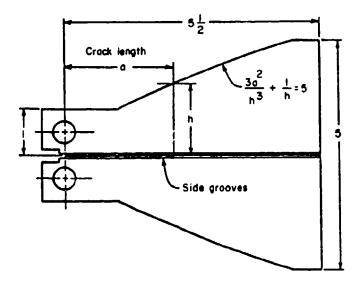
Bolt-Loaded Double Cantilever Beam (BDCB) Specimen.
